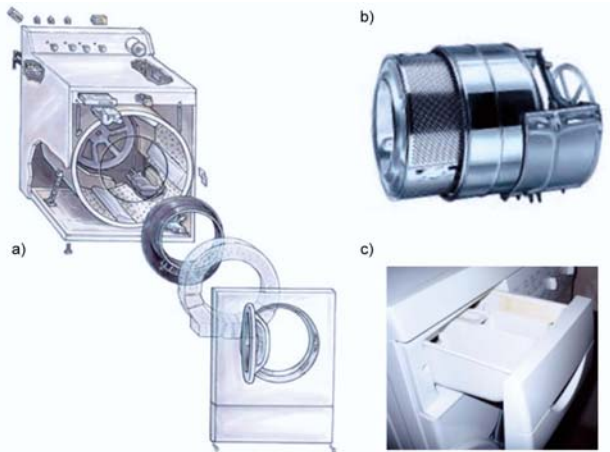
a) Front loading washing machine, b) Tub, and c) soap dispenser
